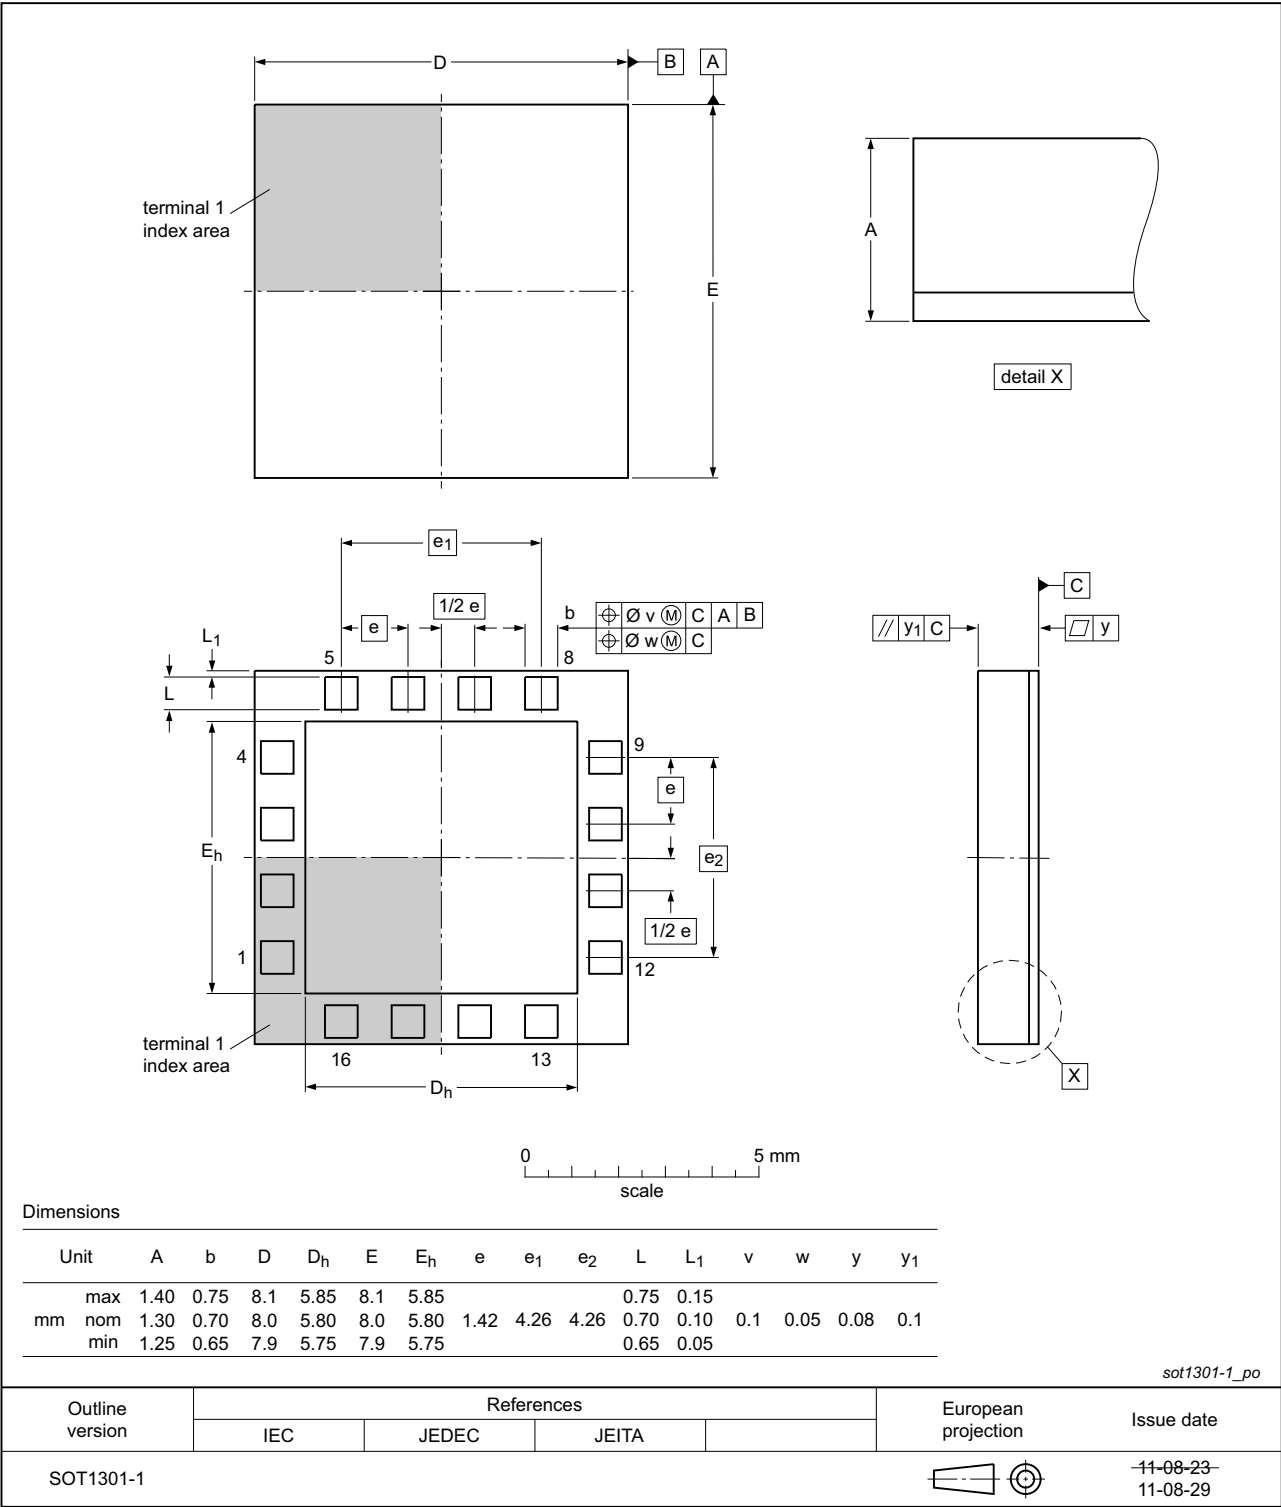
Package outline SOT1301-1 (HLQFN16R)
